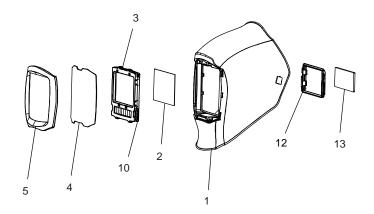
Infinity Auto-Darkening Welding Helmet
